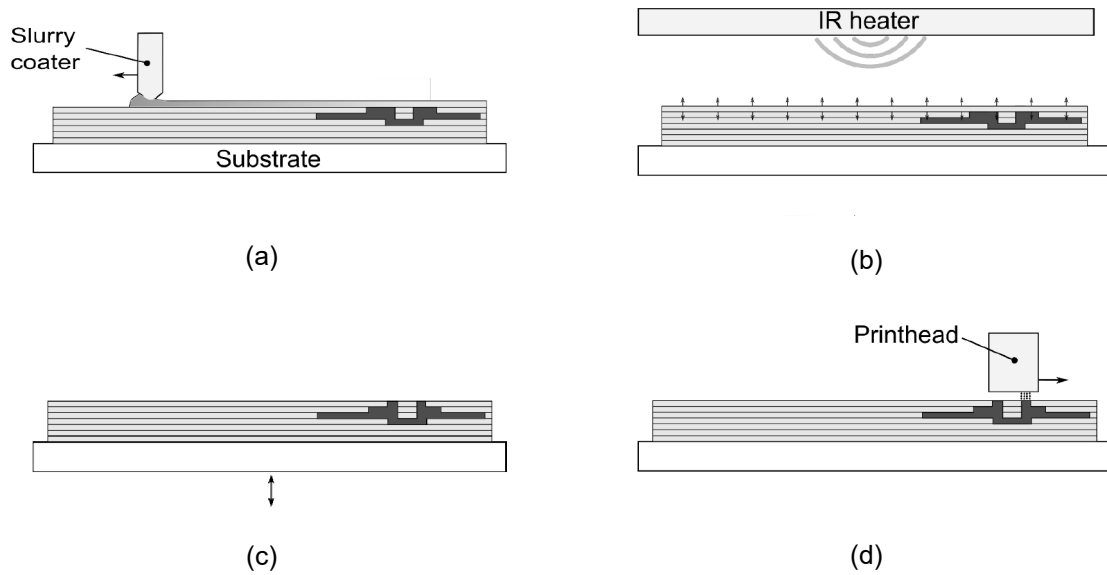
Slurry-based 3D printing sequence realised in the test setup: (a) layer casting, (b) drying, (c) lowering of the build platform, (d) printing.
